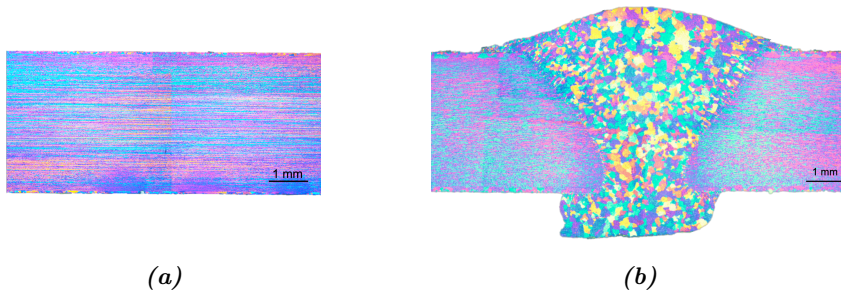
Optical micrographs of (a) the base material perpendicular to the extrusion direction and (b) the weld cross-section of welding speed 16 mm/s. The base material shows a fibrous grain structure, while the weld shows the recrystallized fusion zone.
